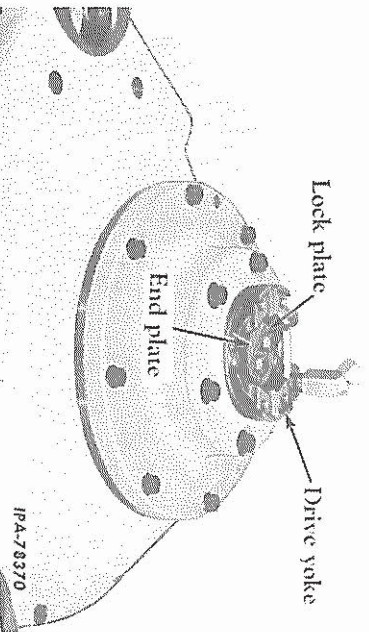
Drive Yoke, Lock Plate and End Plate Assembled
